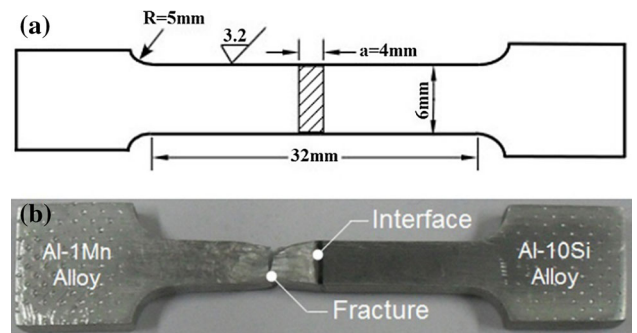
(a) Shape and size of tensile sample and (b) the tensile fractured specimen.
